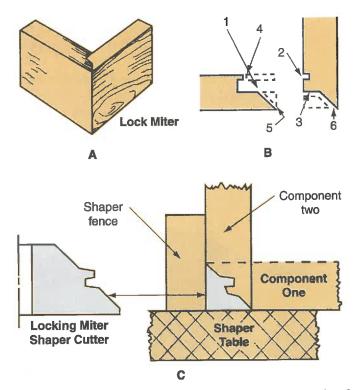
A—Lock miter. (*Delta International Machinery Corp.*) B—Series of cuts taken on the table saw to create the joint. C—The lock miter can also be cut on the shaper with a single cutter.
